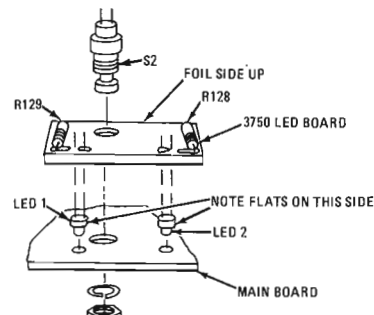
LED BOARD is mounted directly to the main PC board. Point-to-point wiring to main PC board is shown in Fig. 7. Components are mounted on foil side of board.
